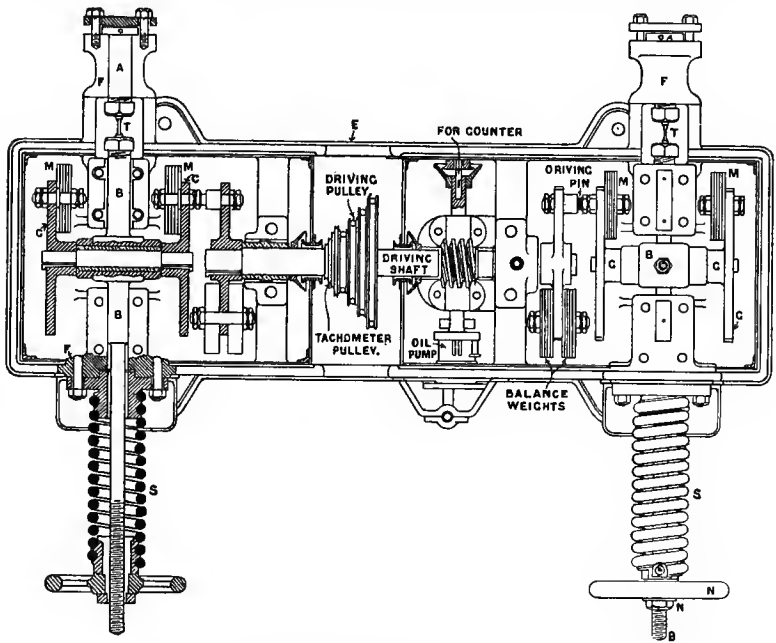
A.—Dr. Smith's patent reversal testing machine.
